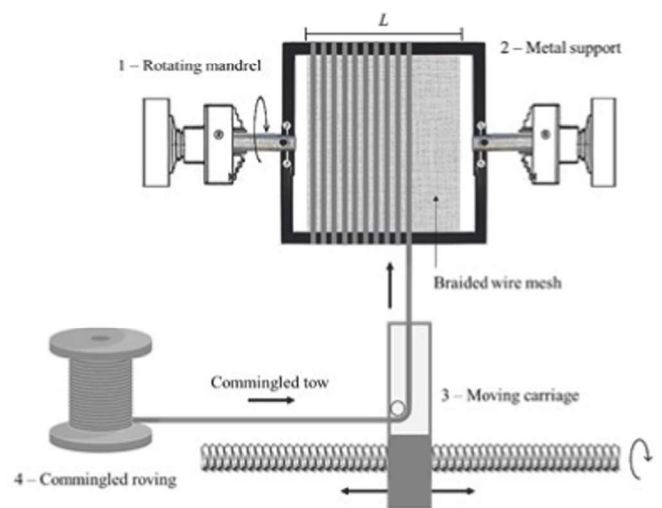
Filament winding mechanism used to manufacture carbon fiber/poly(ether-ether-ketone)/braided wire mesh (CF/PEEK/BwM) hybrid composites.
